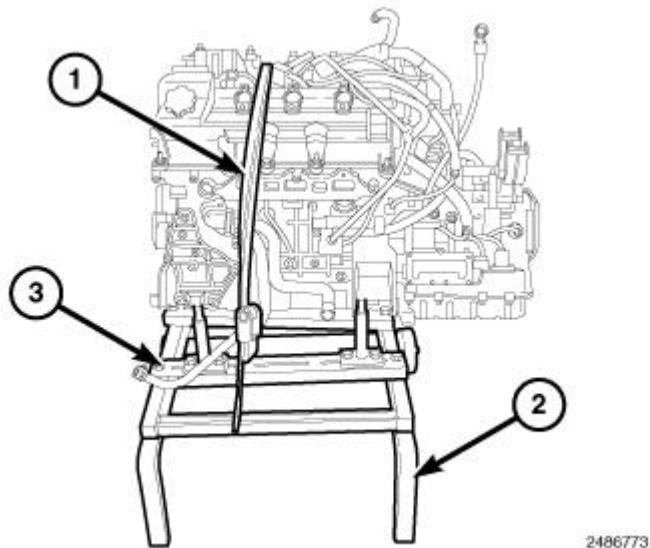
Powertrain Dolly & Engine Support Cradle With Posts
